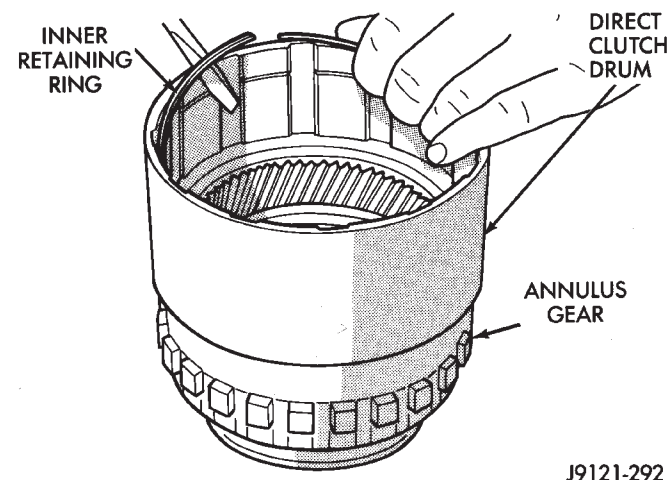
Clutch Drum Inner Retaining Ring Removal
